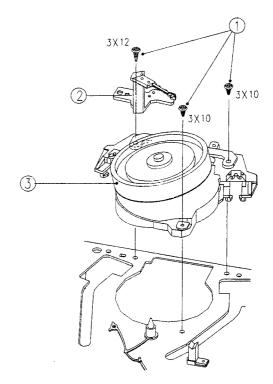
DRUM TOTAL ASS'Y & EARTH BRKT ASS'Y REMOVAL
